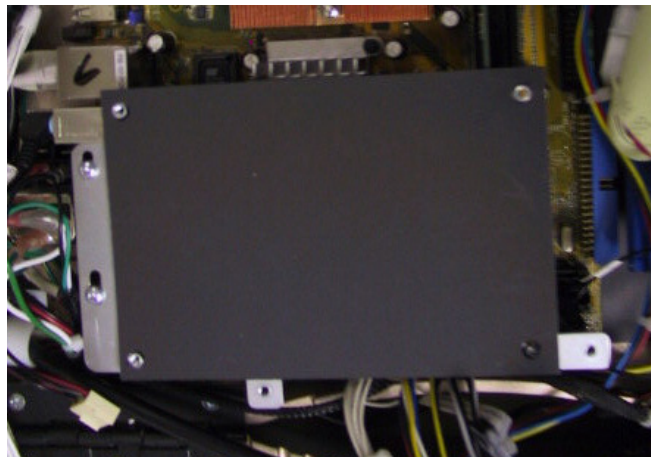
FISH PAPER BETWEEN I/O BOARD AND MOUNTING PLATE
